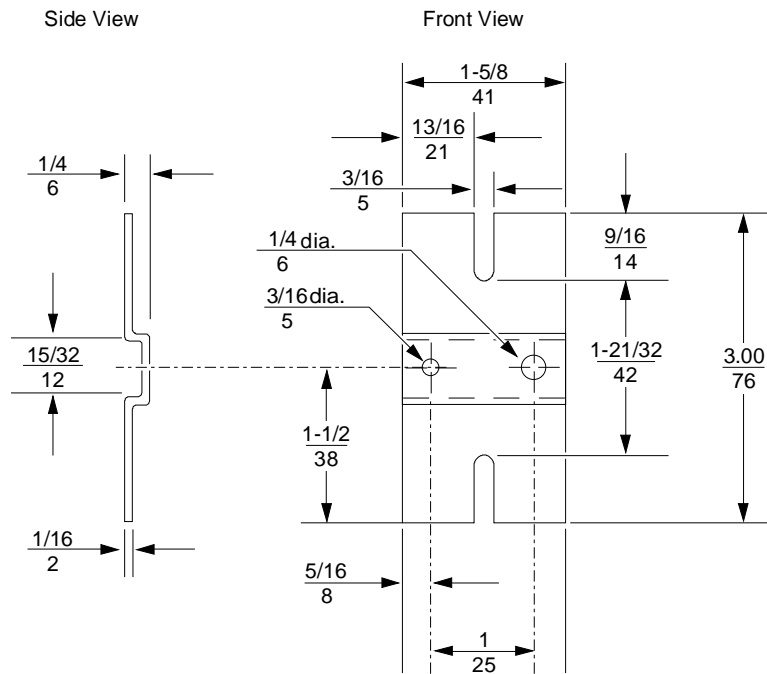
Transducer Mounting Bracket Dimensions, in./mm
